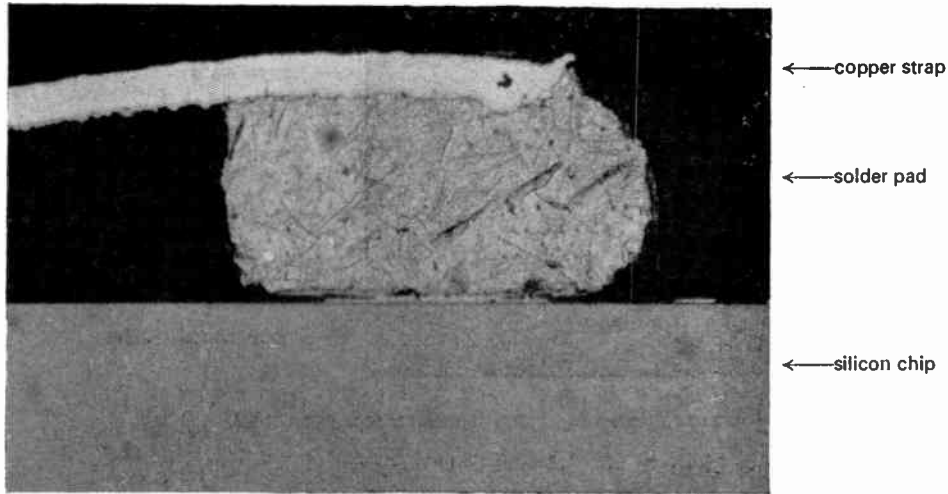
Strap to chip pad solder joint ($\times 420$).
